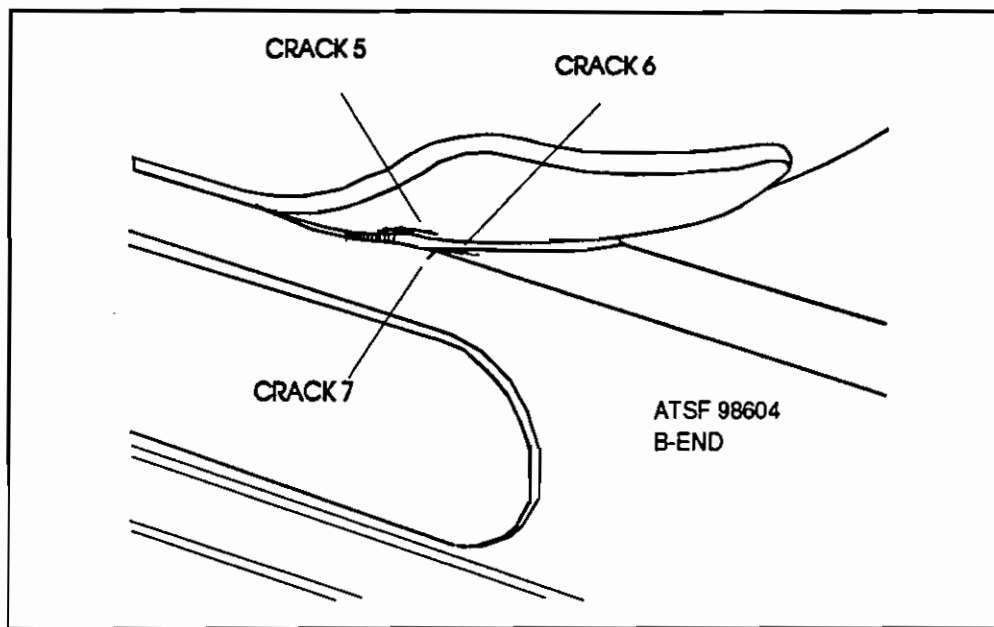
B-end, Left Side Cracks at Head Pad to Sill Connection
